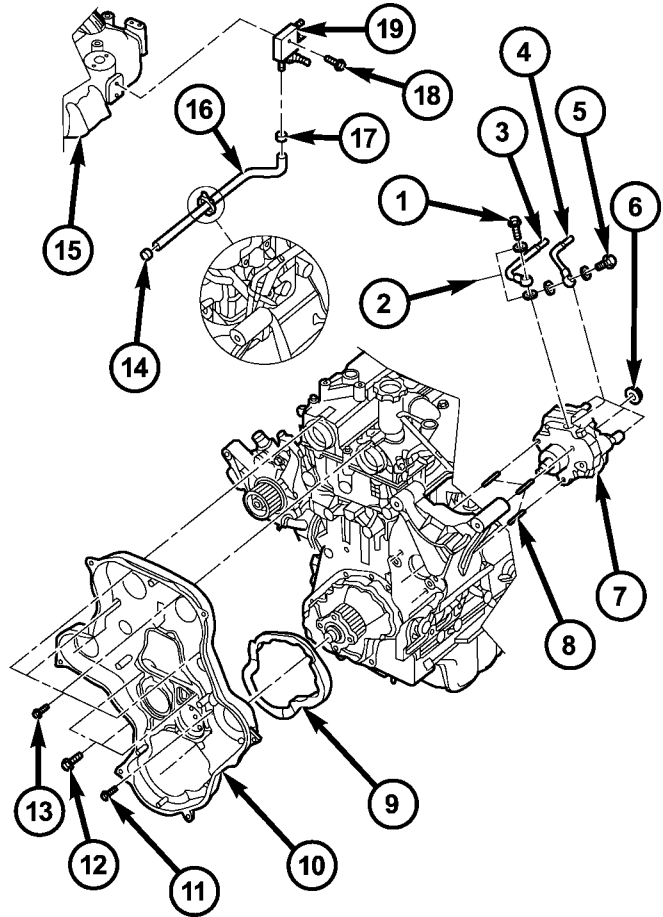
FUEL INJECTION PUMP REMOVAL/INSTALLATION
